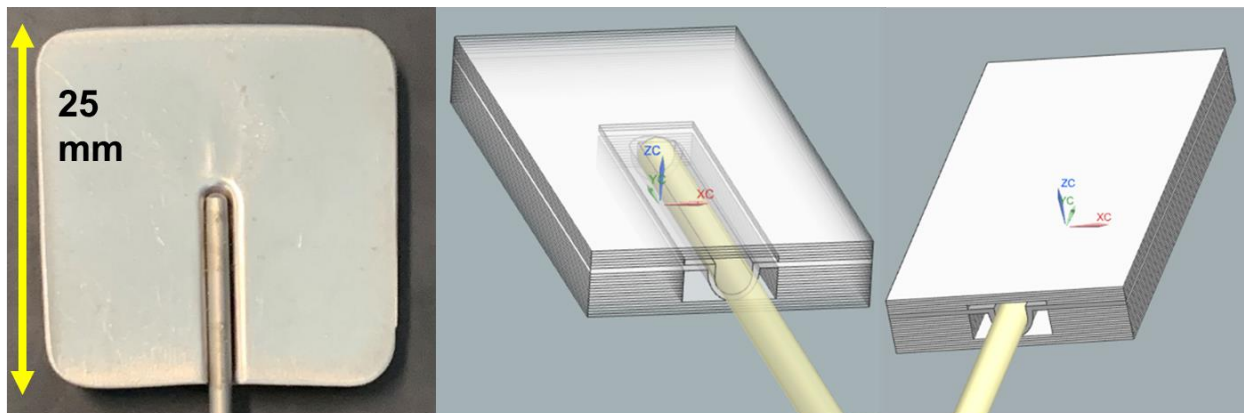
Images of WPTC weld pad (left), embedded WPTC weld pad with translucent layers (center), and embedded WPTC weld pad (right).
